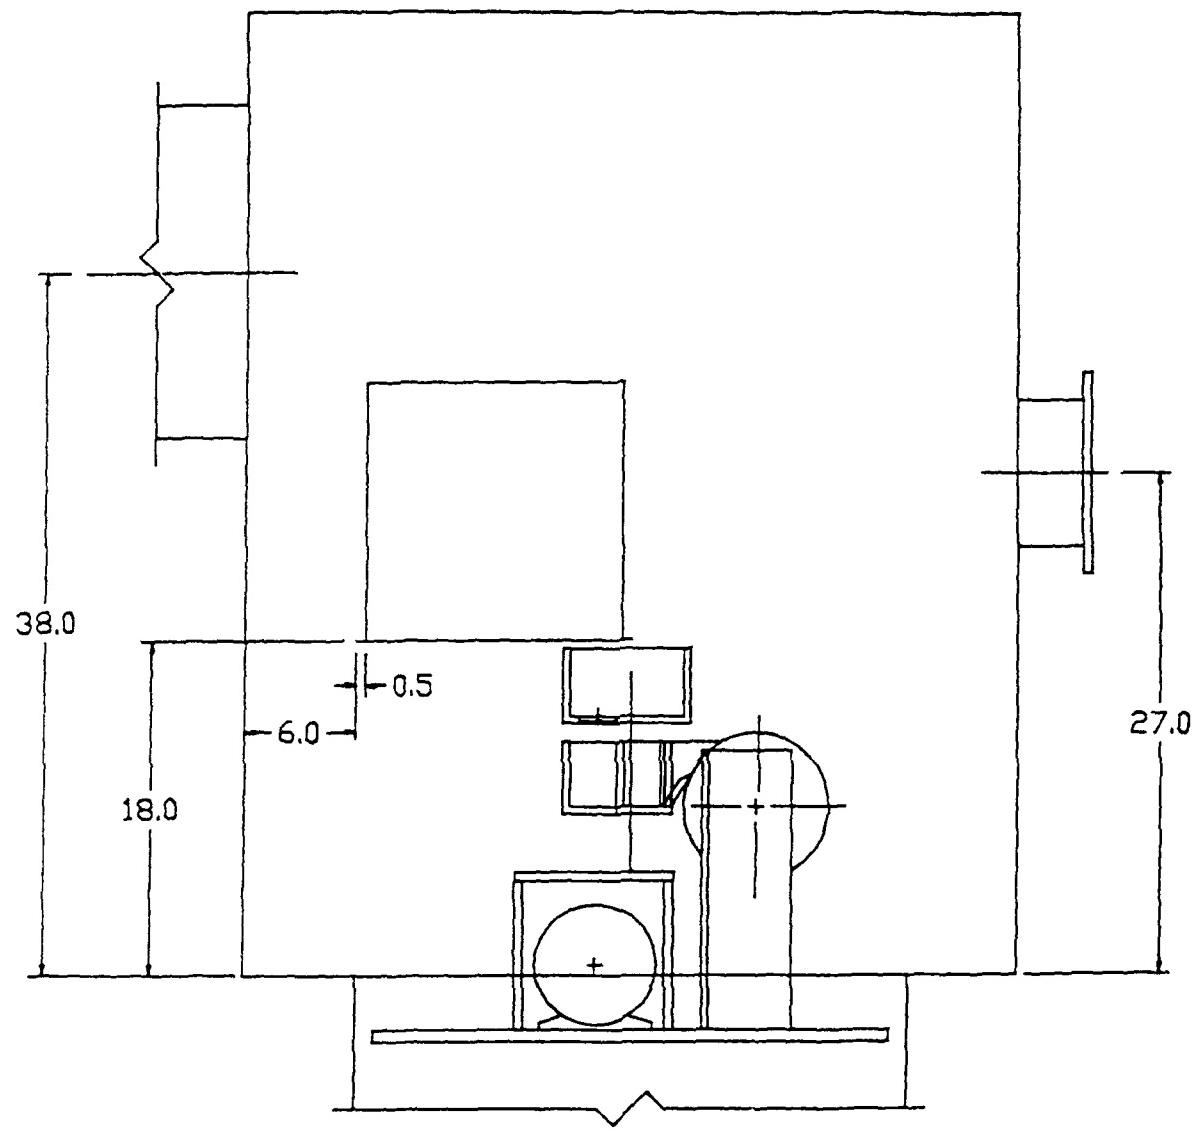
Drawing of Melt Overflow Casting Machine (side view)
